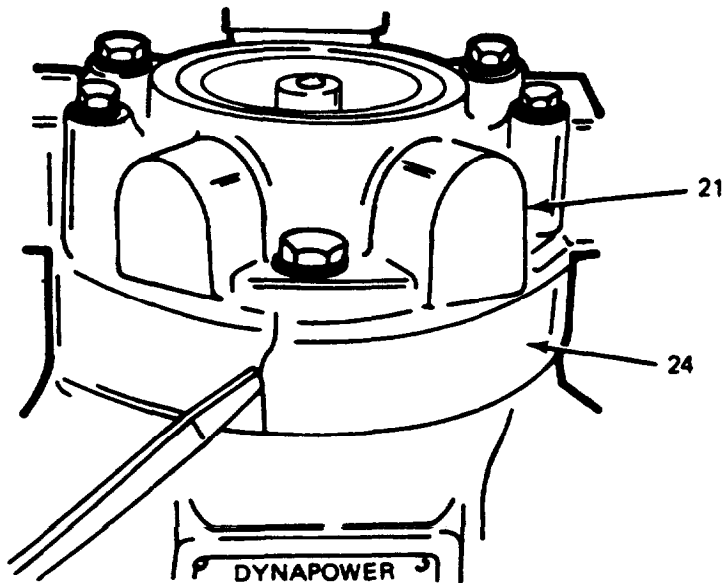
Charge Pump Eccentric, Inner and Outer Rotor.
